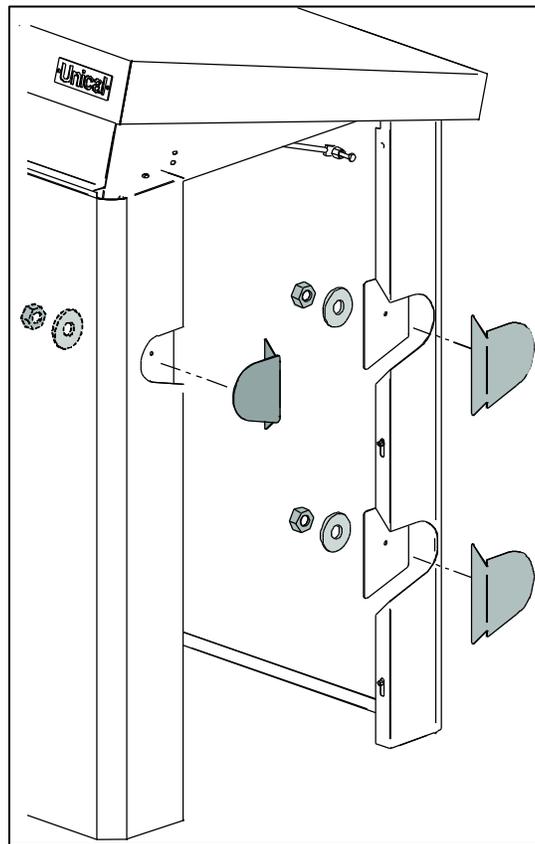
Caps and Plugs Used for Closing Up Vacated Gas and Hydraulic Connection Openings
